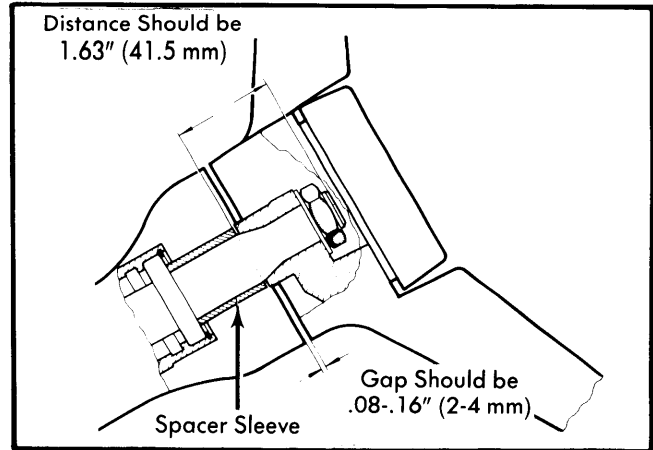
Steering Wheel-to-Column and Spacer Sleeve Adjustments
